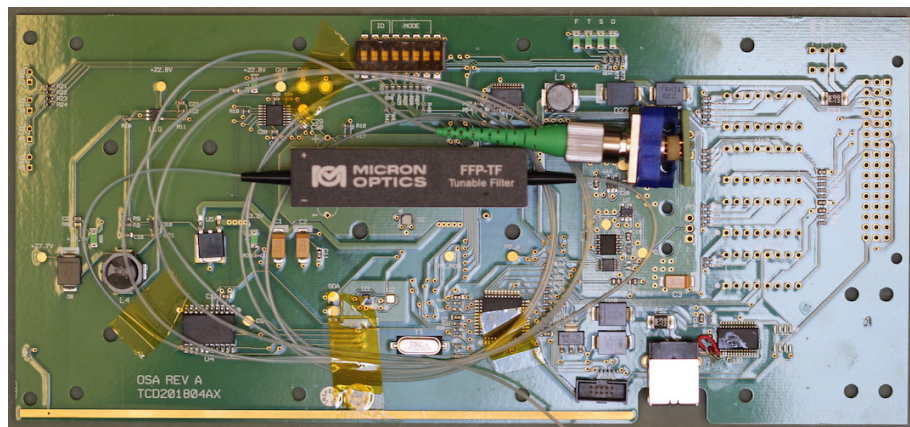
Photograph of partially assembled OSA module. Connectors and electrical buffers on the right hand side of the image have not been populated in this photograph.
